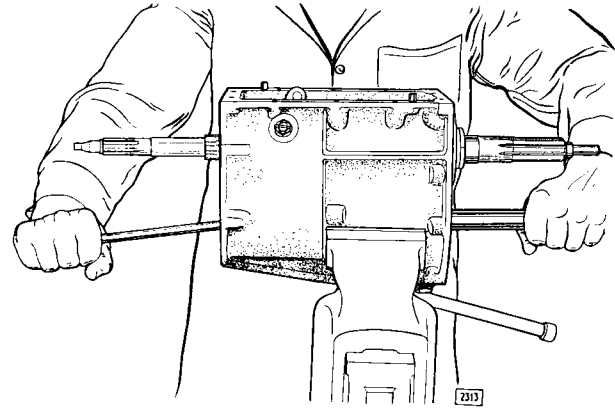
Lifting the layshaft into mesh and inserting the dummy countershaft
